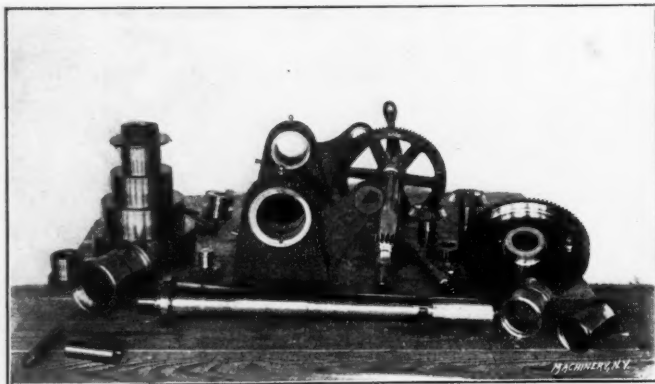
Headstock of Hendey-Norton Lathe, unassembled.
